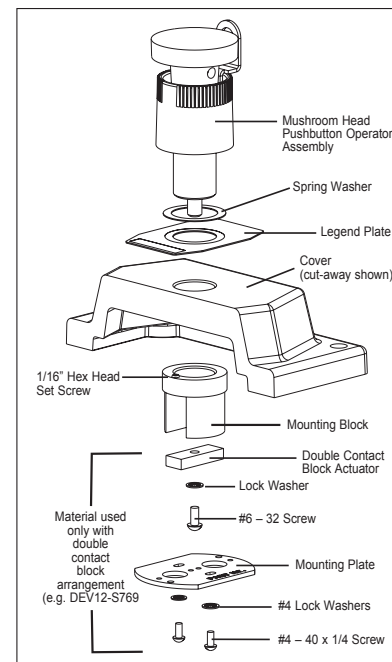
Assembly of Maintained Mushroom Head Pushbutton Operator
